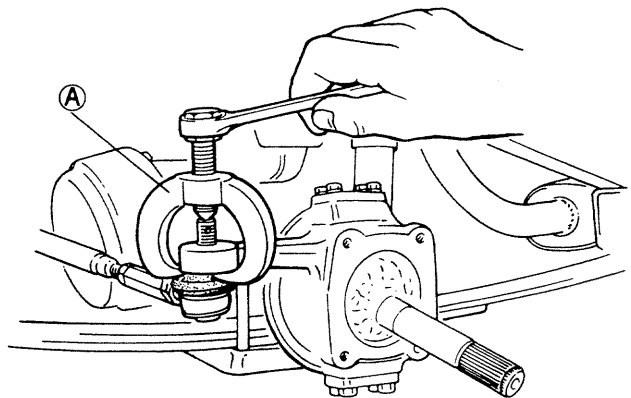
Special tool (A) (Tie Rod End Remover 09913-65210)
